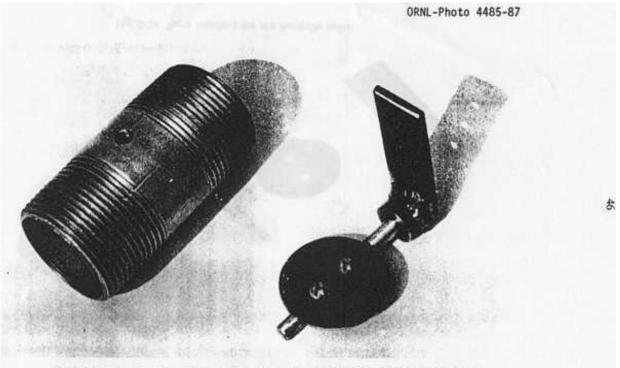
Butterfly valve assembly. Note that the valve has been assembled outside of the valve body for clarity.
